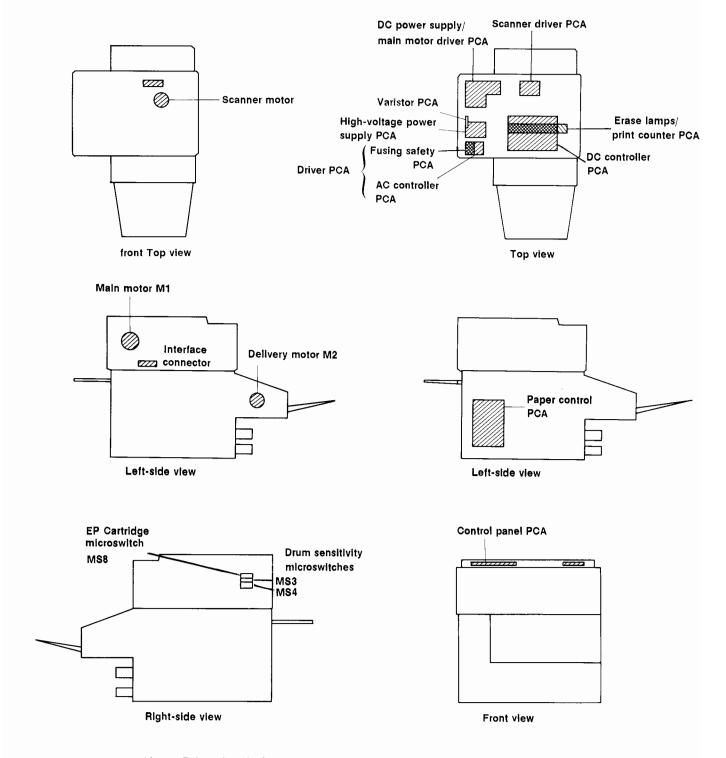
Electrical Component Layout HP 2686D (part 2 of 2)
